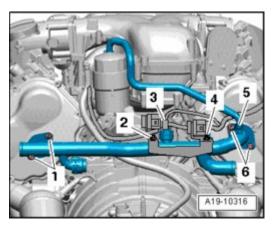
Identifying Nuts, Bolts, Electrical Connector On Engine Coolant Temperature (ECT) Sensor G62 & Coolant Hose
